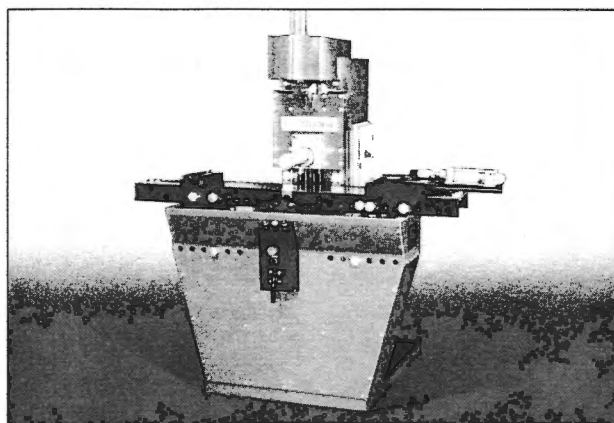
Fast operating bending machine for chair backs and bendings up to 90° angle STUZAMA VP
